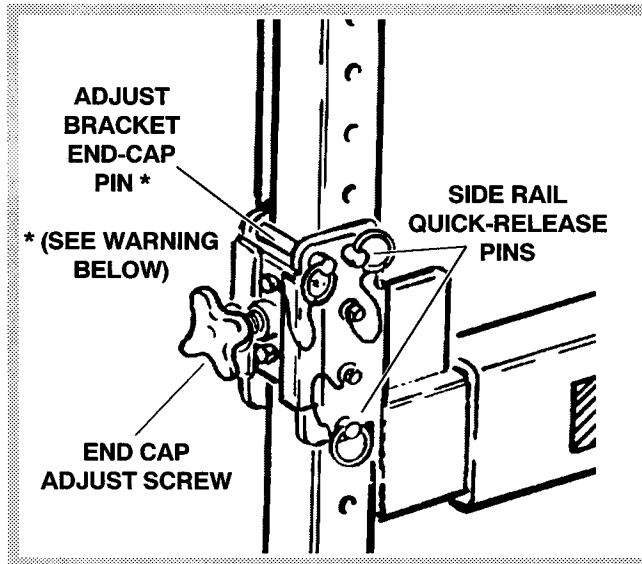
Lowering AccessMaster[®] on Straddle Unit - Side Lifting Rail Quick-Release Pins.
